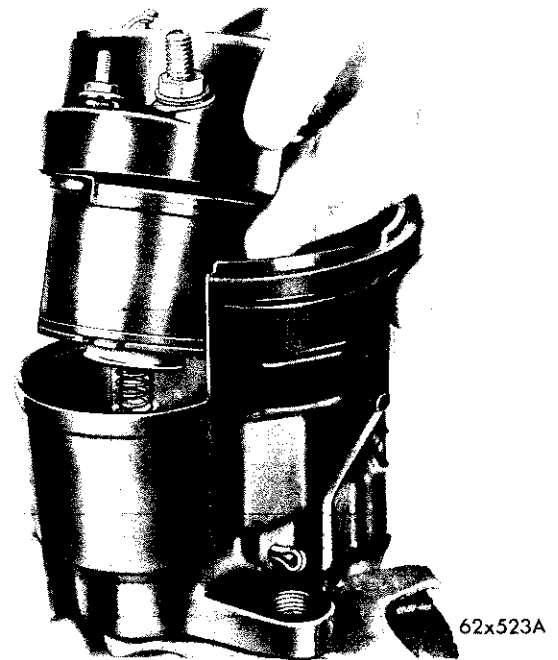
Installing the Solenoid and Brush Holder into the Gear Housing
